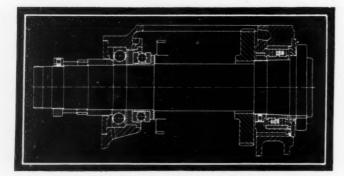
Universal turret lathe spindle mounting incorporates both radial and thrust bearings
